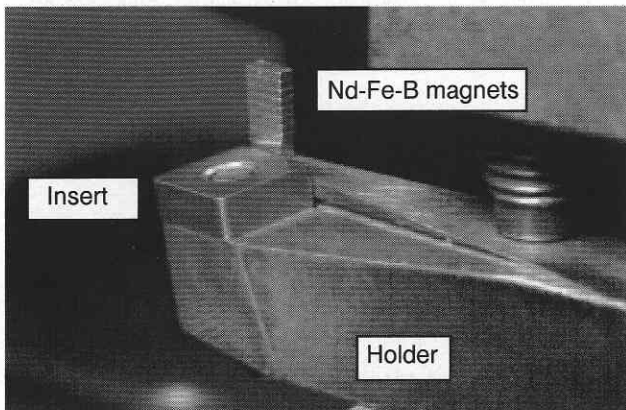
Tool holder and insert with Nd-Fe-B magnets
